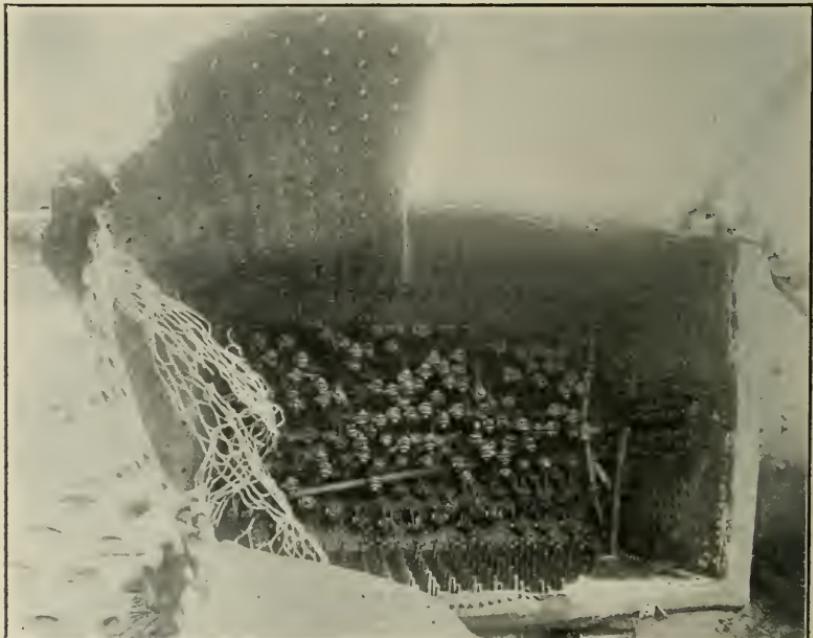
PLATE II.—Exploded boiler lying on one side with tube-sheet to left and side of fire-box seen above.
